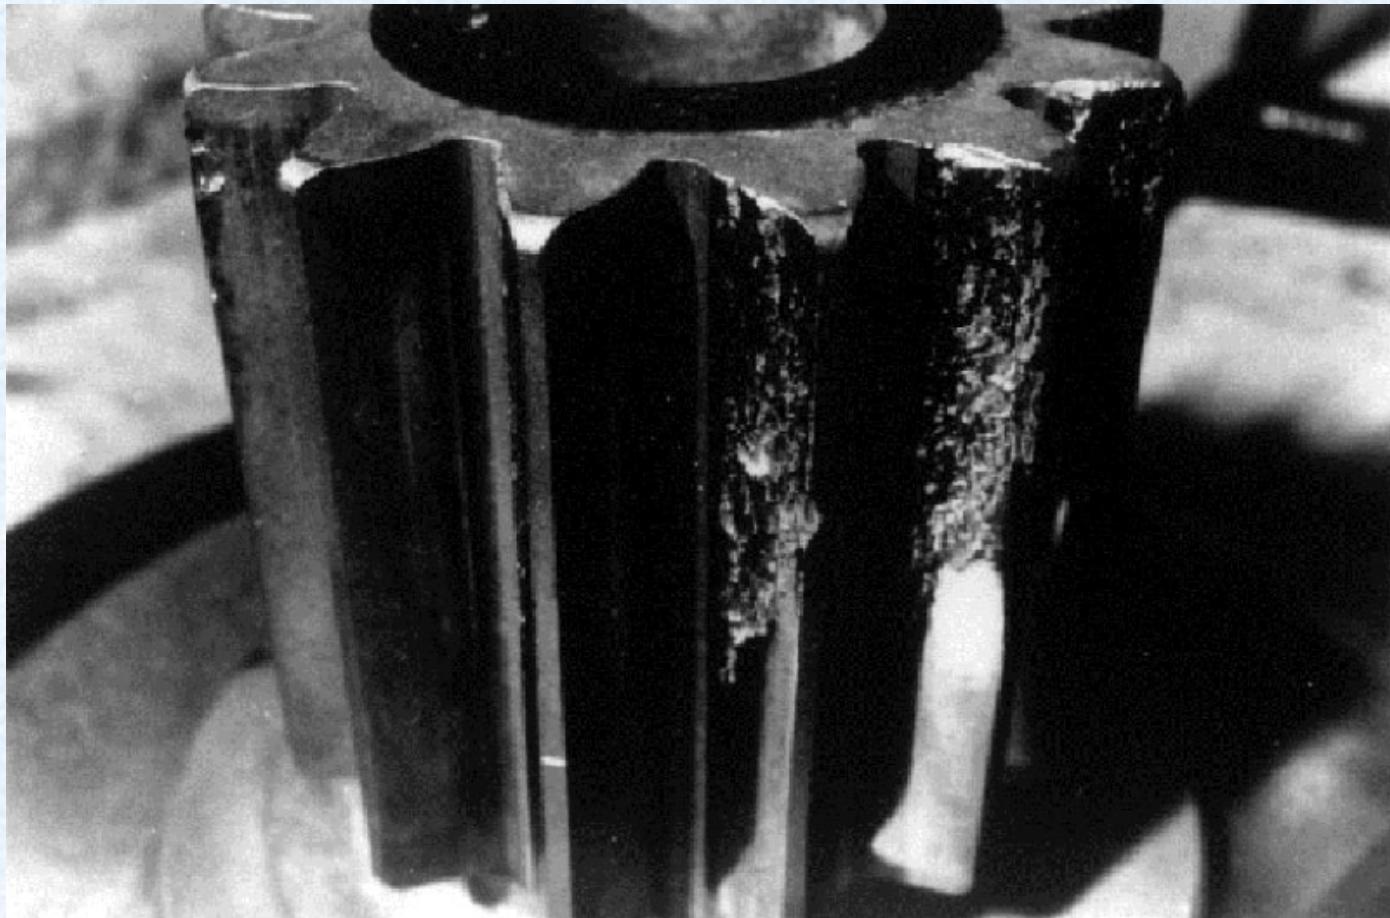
A gear showing extreme pitting or spalling. *Source:* Courtesy of the American Gear Manufacturing Association.
